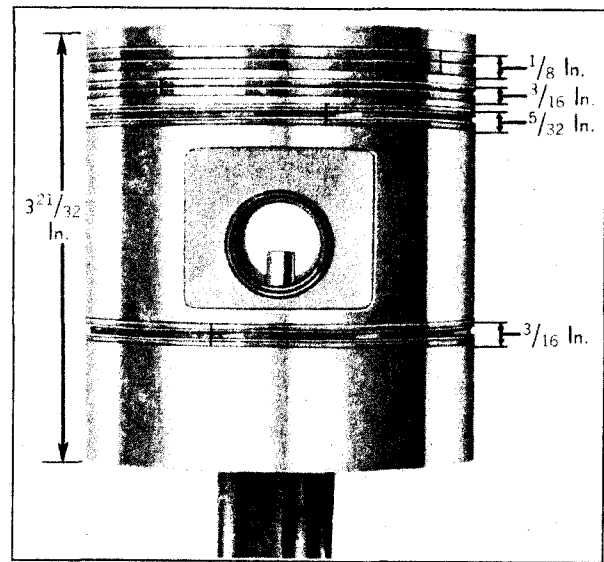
345-B and 355-B piston, showing the new type oil rings
